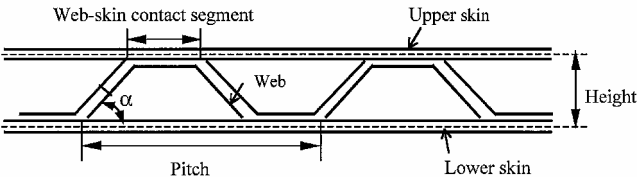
Cross section of a truss-core sandwich panel with continuous trapezoidal-shaped corrugation.
